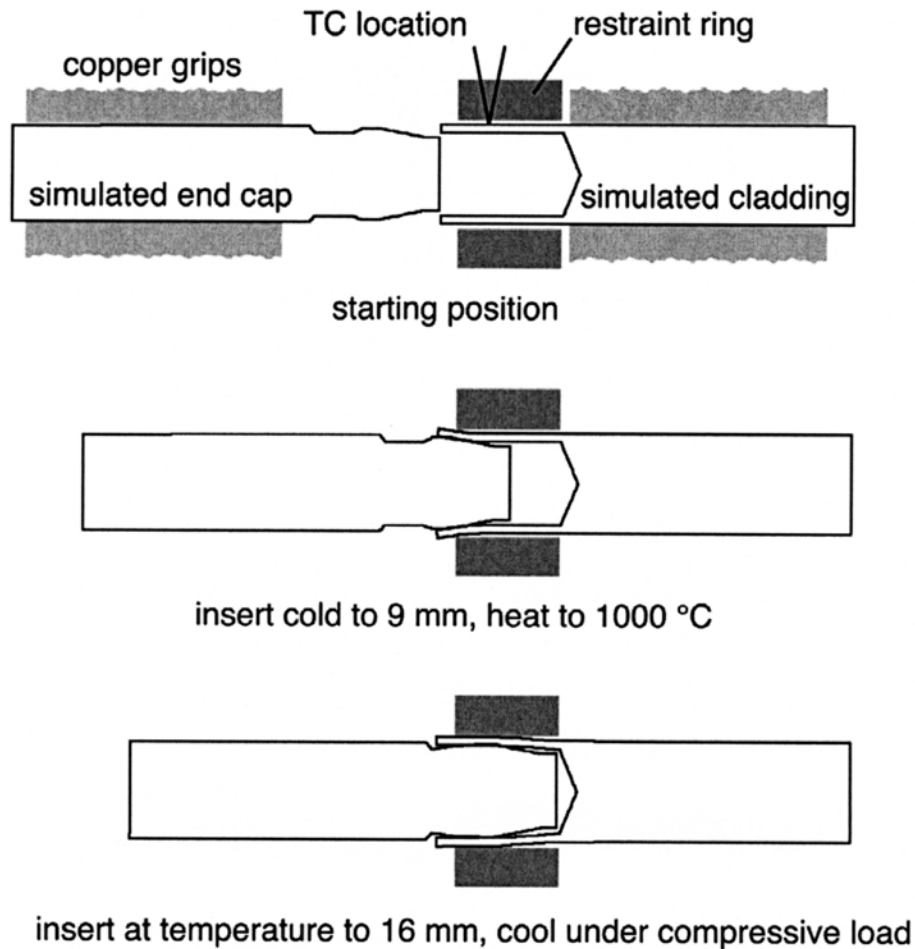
Schematic representation of joining procedure used in resistance forge welding trials.³¹
